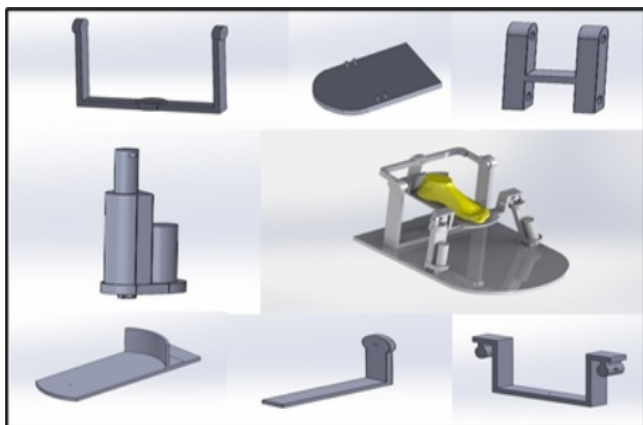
CAD Model of the Exoskeleton Parts and its Assembly in Solid Work
